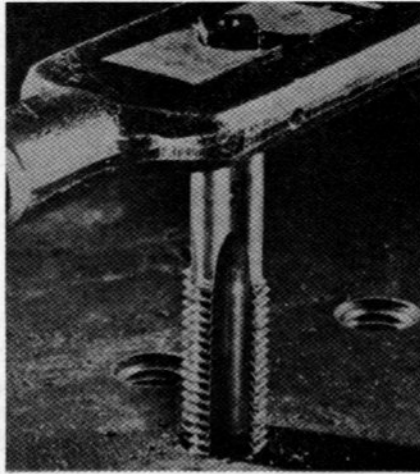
Special drill taps are provided in thread repair kit for threading drilled hole to correct size for outside of thread insert. A standard tap cannot be used.
